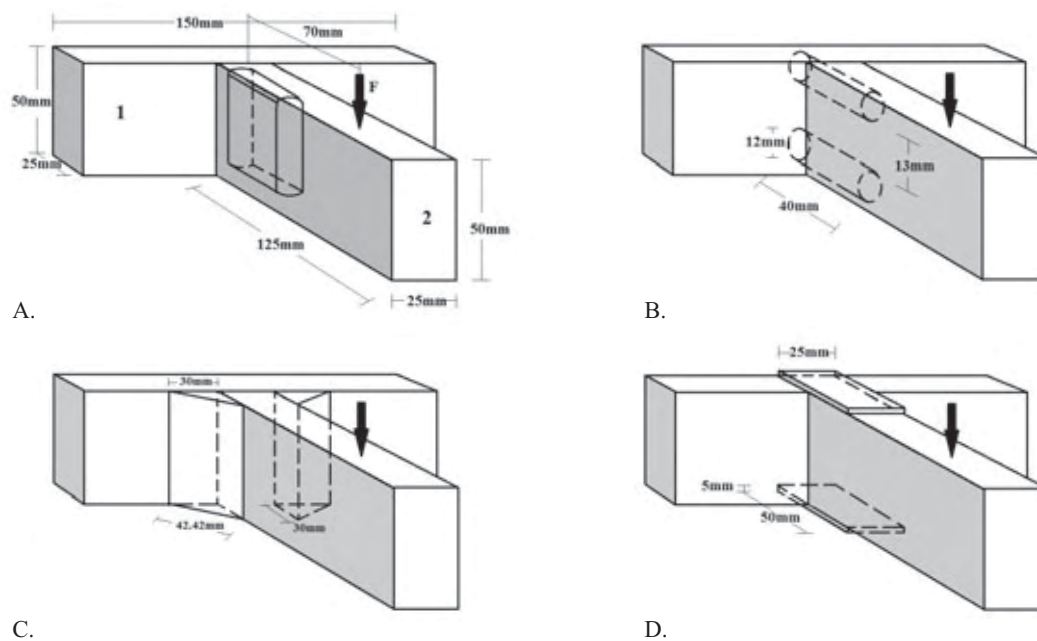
Configuration of specimens and the way of application of edgewise bending load: A. mortise and tenon joint, B. double dowel joint, C. corner blocks, D. double gusset plates
